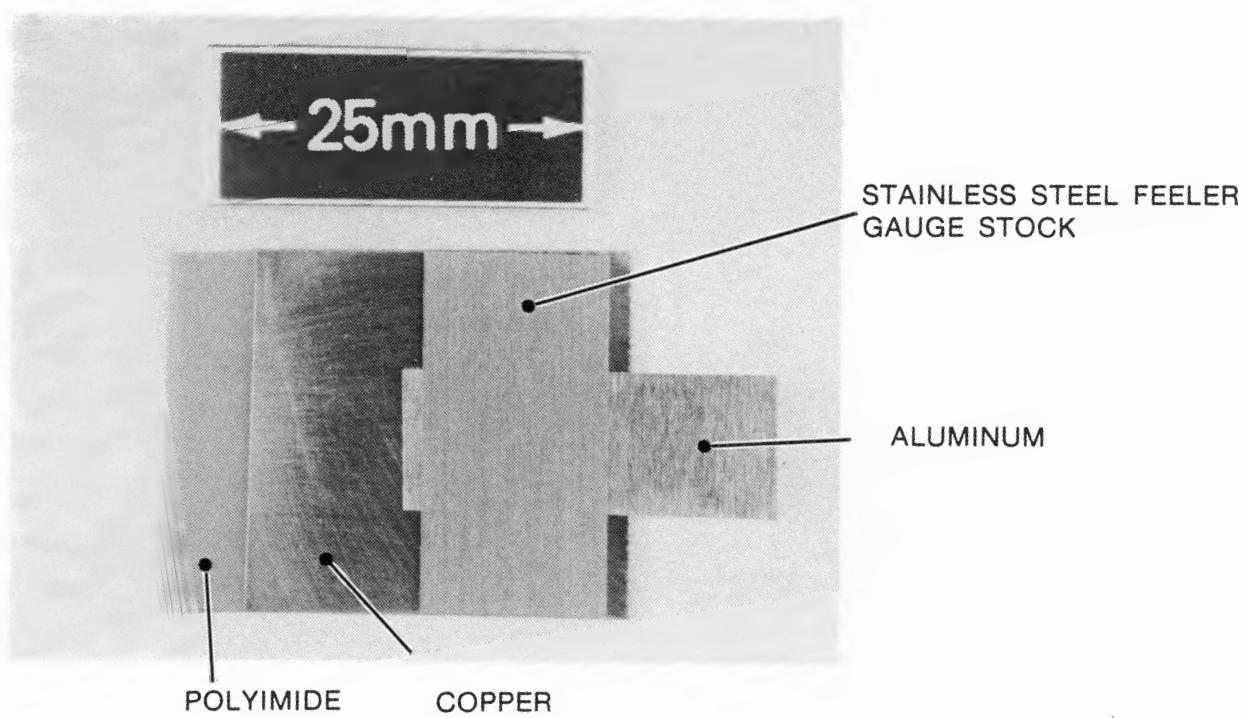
Parallel Gap Weld Sample Configuration
